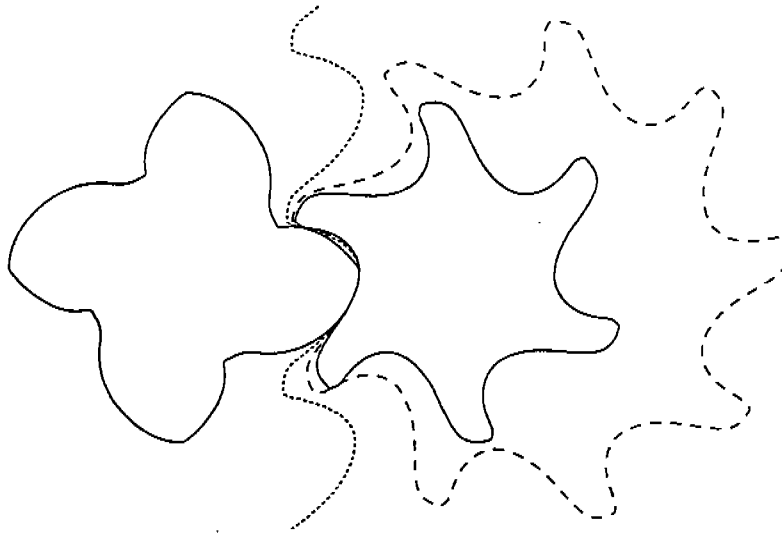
View of a pair of "N" rotors: solid - actual rotors, dashed - template rotor, dotted - rack
